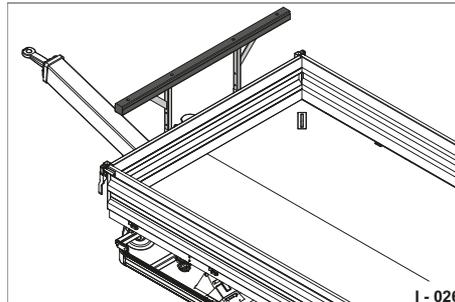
Support frame on front wall, e.g. for wheel loader / excavator bucket
